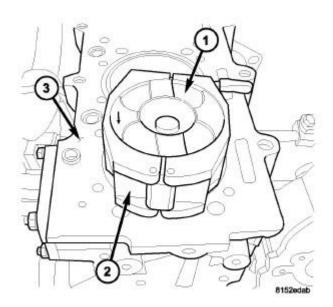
PISTON INSTALLATION Courtesy of CHRYSLER LLC
